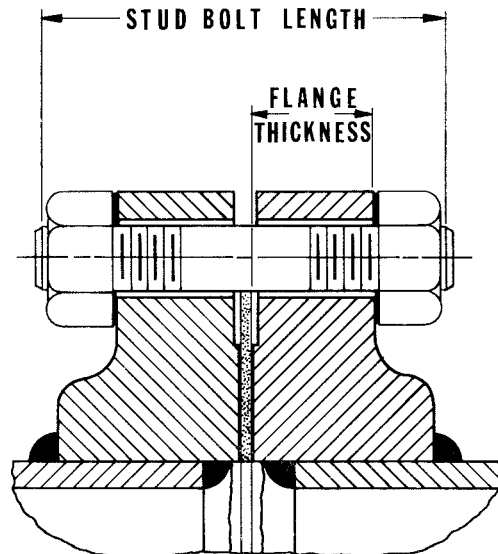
Flange Stud Bolt Assembly for 125- to 300-psi Flanges
